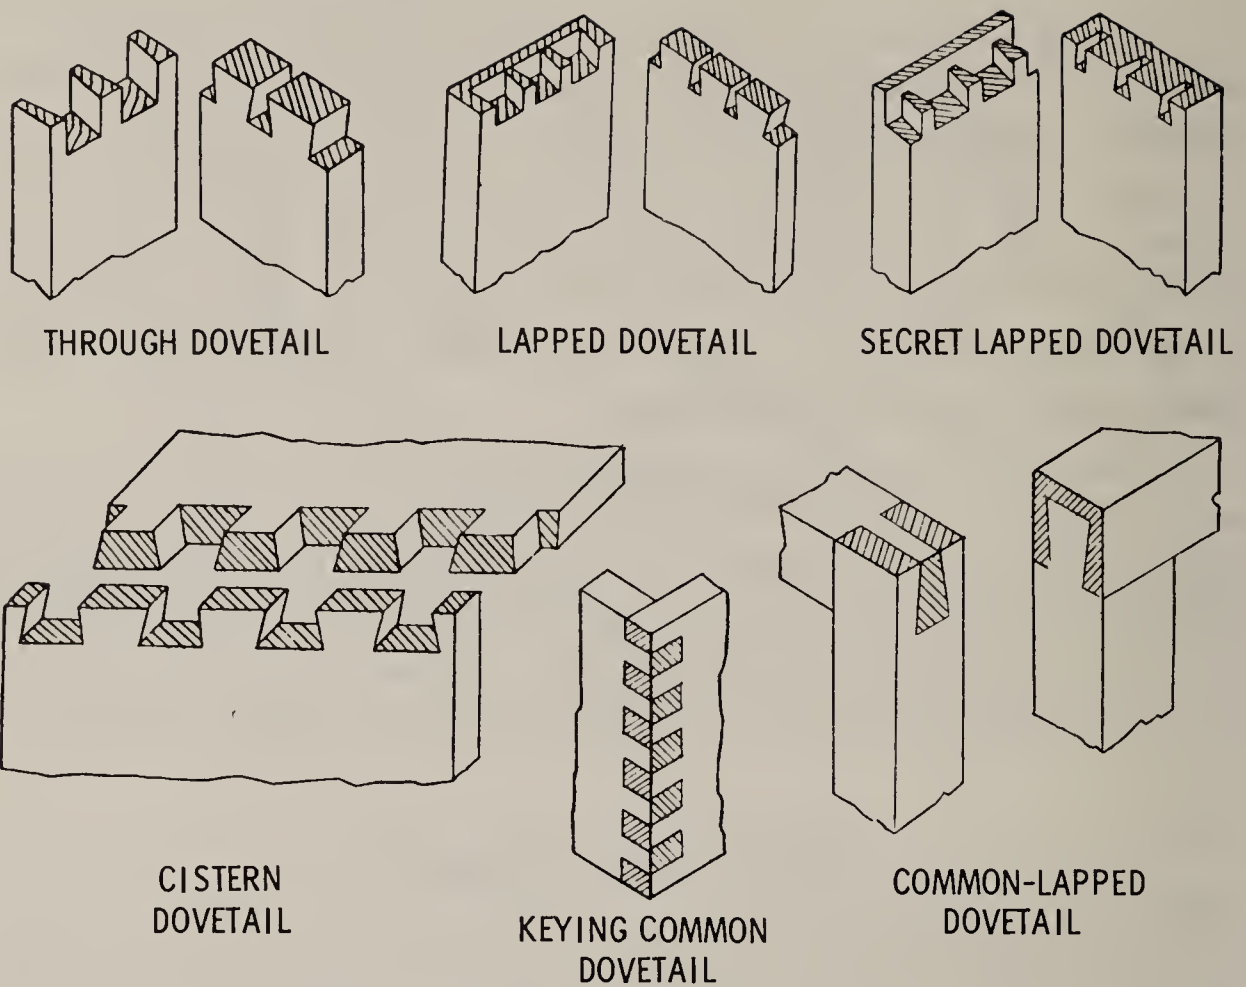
Various types of dovetail joints. Dovetail joints are used principally in cabinetmaking, drawer fronts, and furniture work. It is a partly housed and tapered form of tenon joint in which the taper forms a lock which holds the part securely together.
